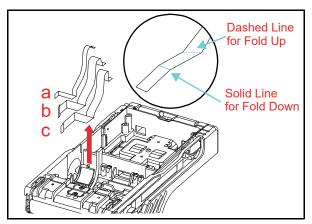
USB FPC, Power FPC & Interface FPC Cable Removal
